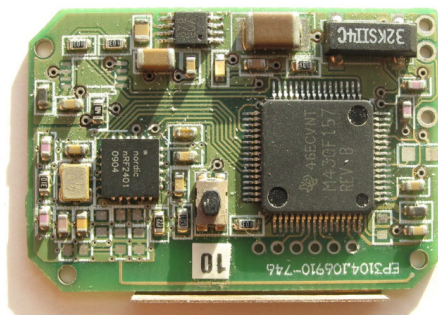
PCB for thermometer unit. Dimensions for PCB: 37 x 25 mm
